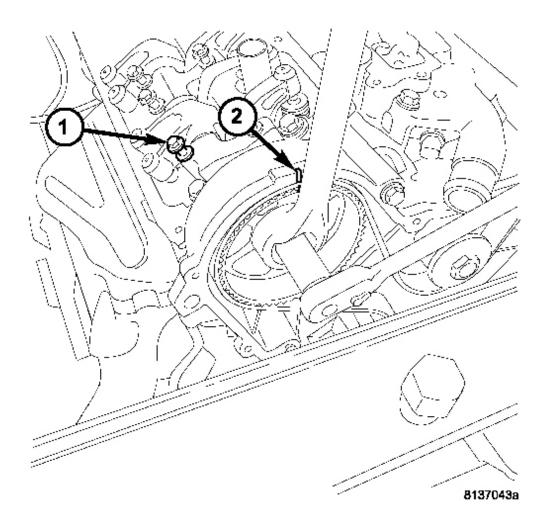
Identifying Timing Gear Components Courtesy of CHRYSLER LLC
